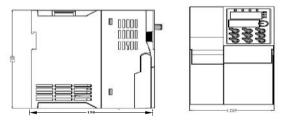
HE100 plastic 5.5-7.5KW structure external dimension and installation dimension diagram
